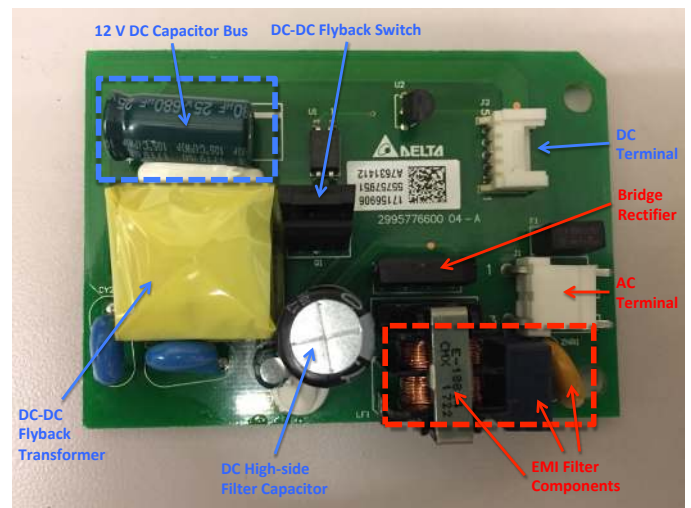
The original rectifier board that converts 120 V_{RMS} AC to 12 V DC. The board dimensions are 8 x 6 cm.
